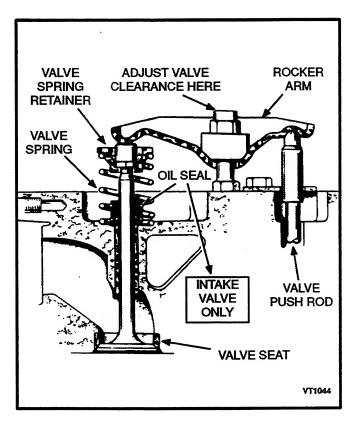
VALVE CLEARANCE ADJUSTMENTS
